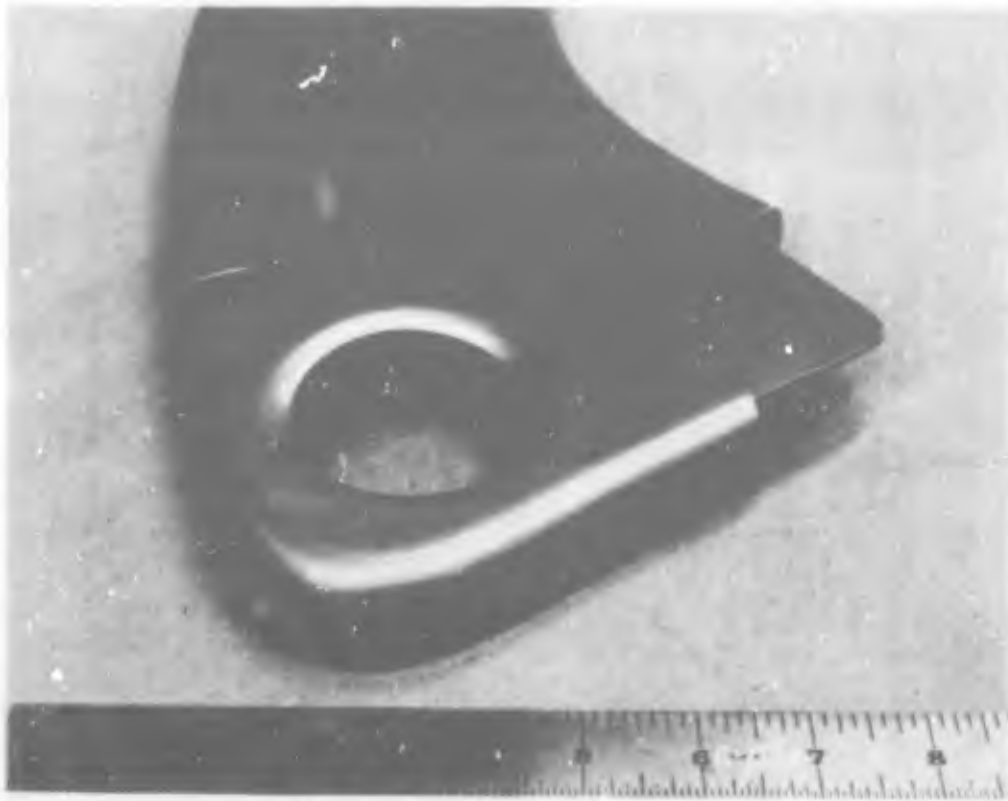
Enlarged Views of Part 5, Frame, Showing Tight Corner Radius
